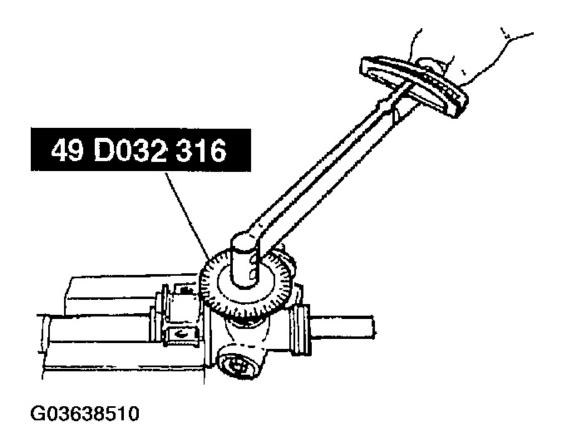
Tightening Adjusting Cover Courtesy of MAZDA MOTORS CORP.
